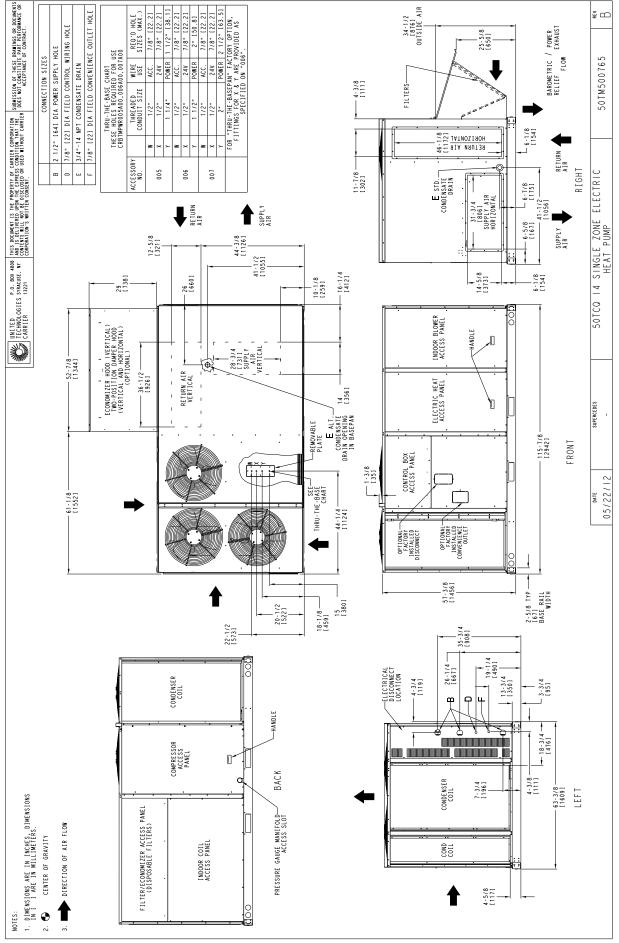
Unit Dimensional Drawing – 14 Size Unit
